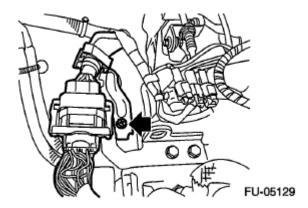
Locating Bulkhead Harness Connector Bolt Courtesy of SUBARU OF AMERICA, INC.
